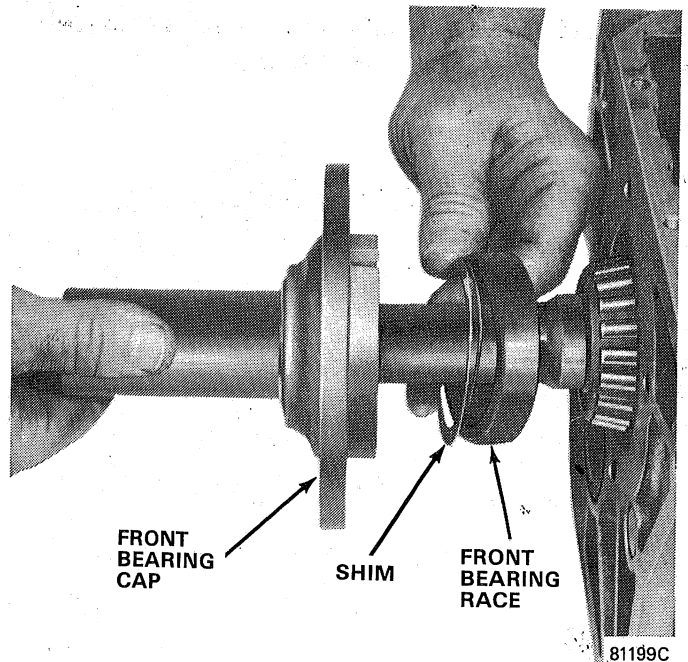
B-12 Front Bearing Cap, Shim and Race Removal/Installation
